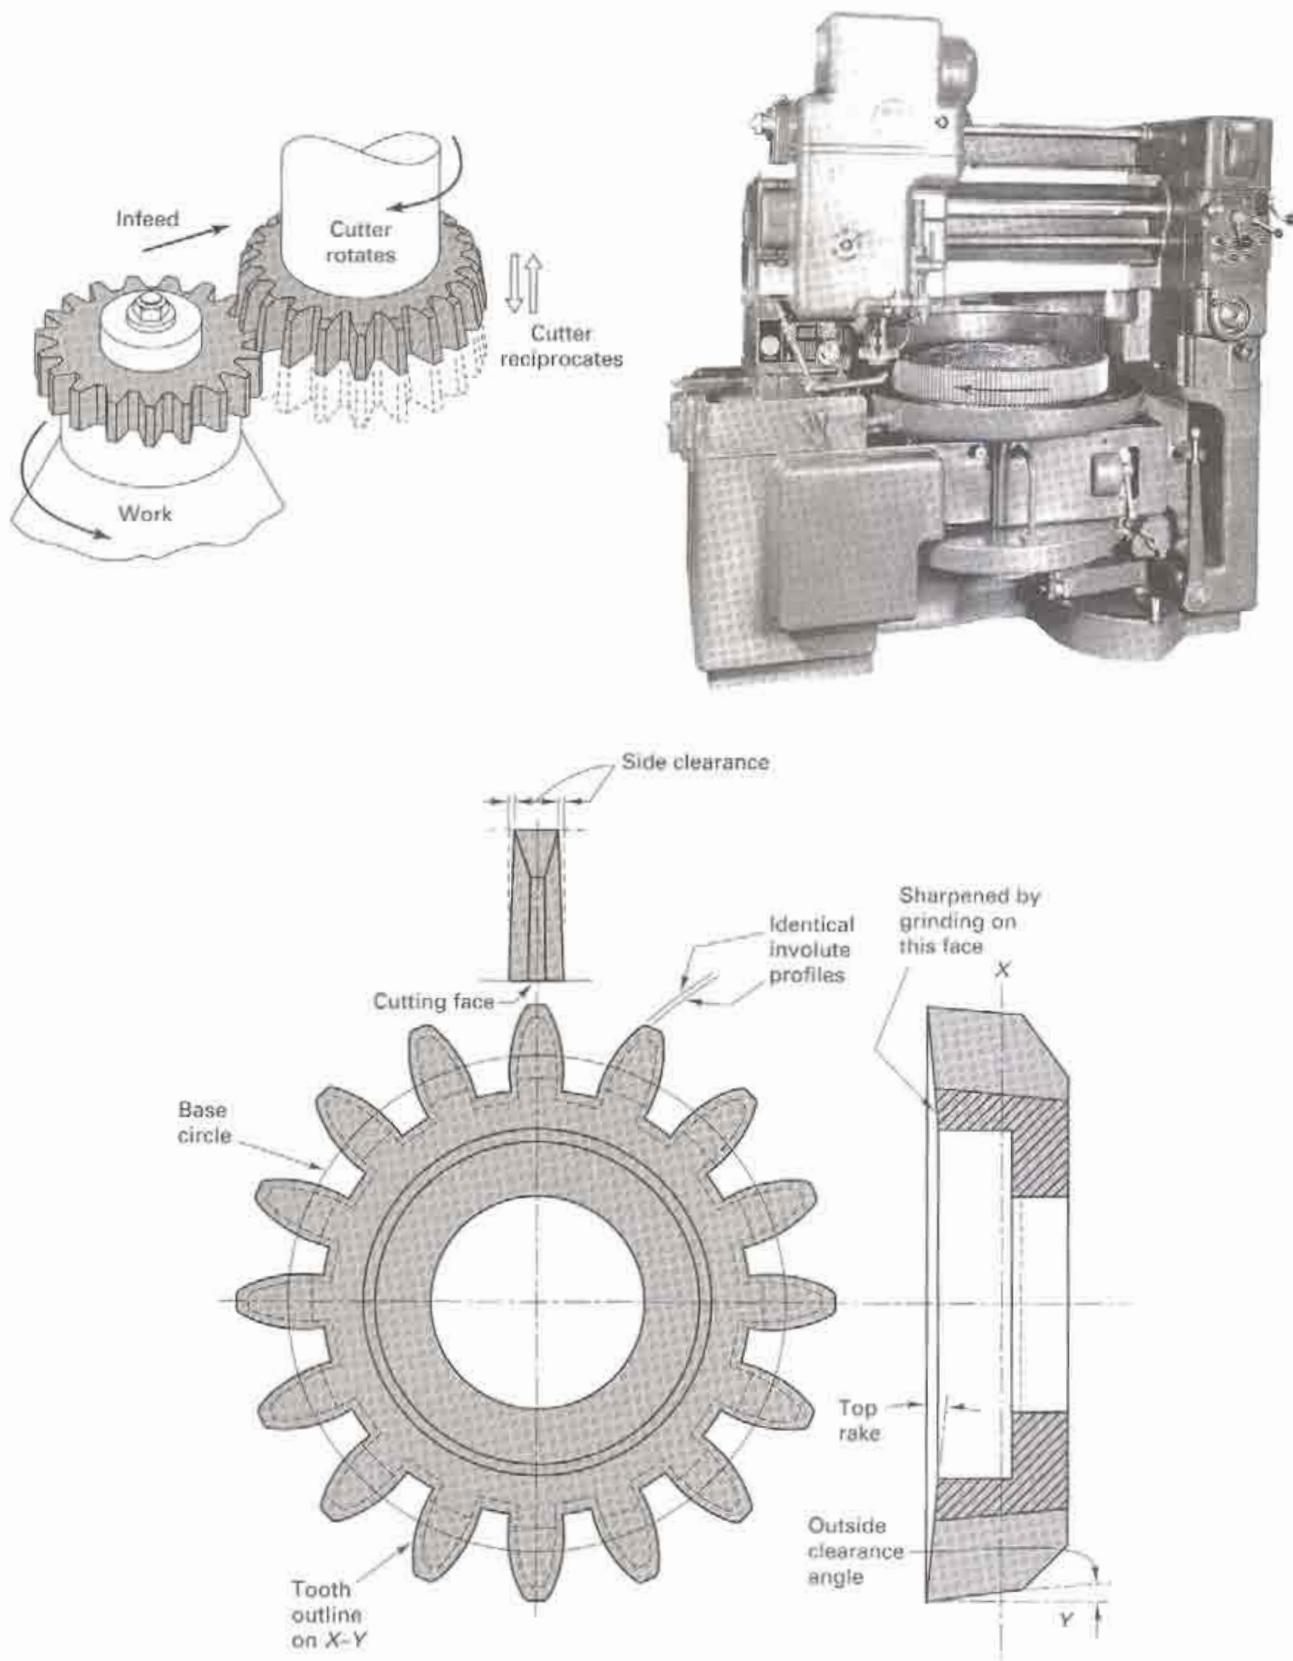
This machine tool is a gear shaper. The blank is rotating while the cutter is reciprocating vertically, as shown in the inset. The tool is very complex and is shown in detail below. (Courtesy Fellows Gear Shaper Company.)
